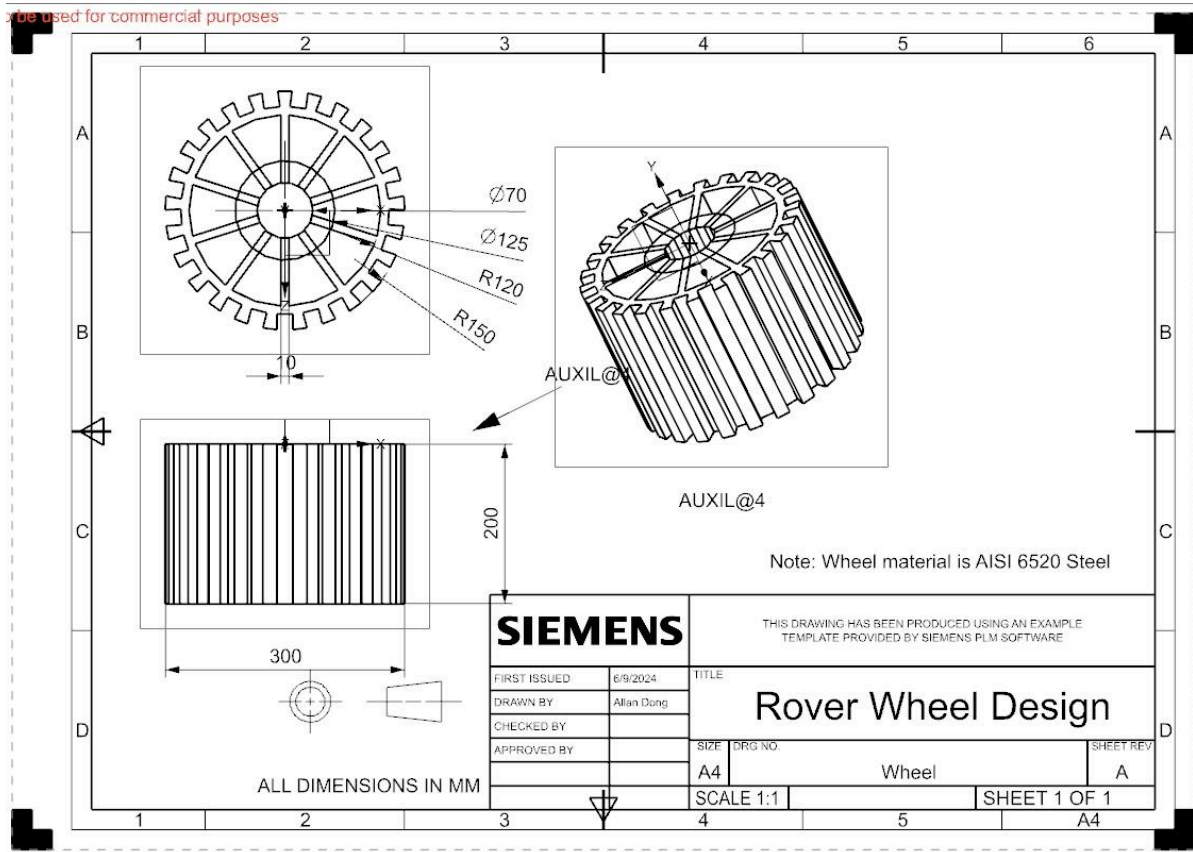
Rover Wheel Design using AISI 6520 Steel.
